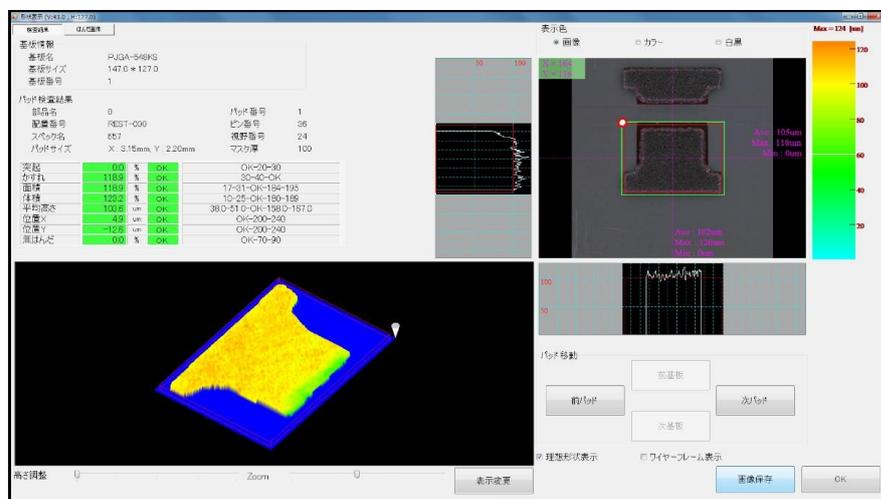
Example of the data for a visual inspection after solder printing
